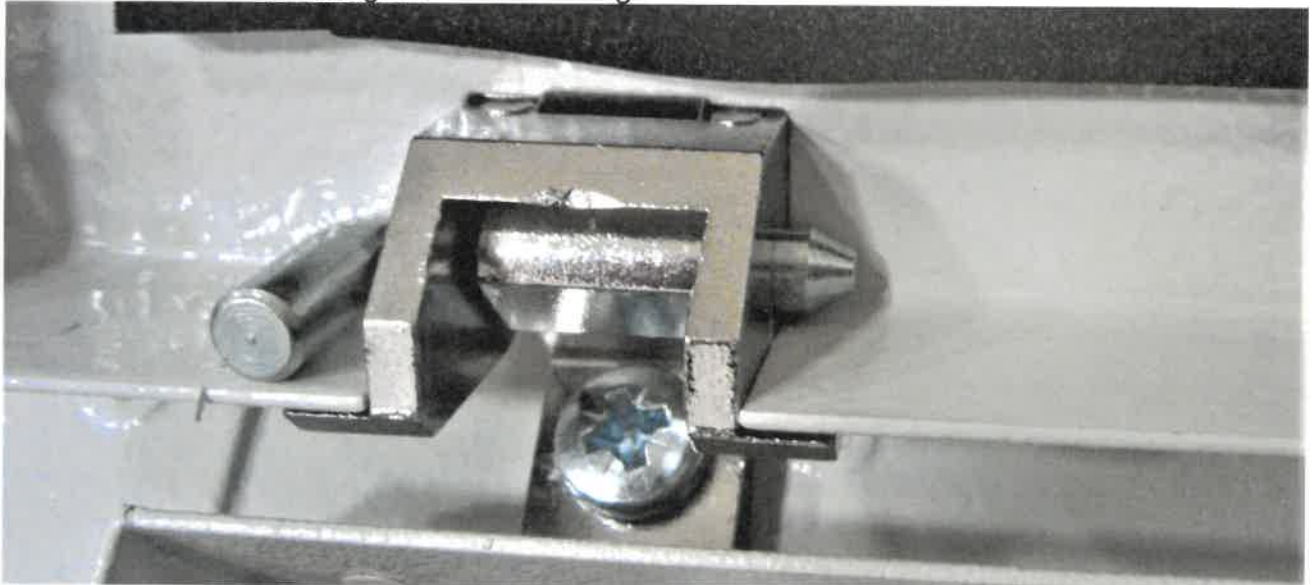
No visible damages (breakage and cracks) of enclosure on right side of the enclosure
